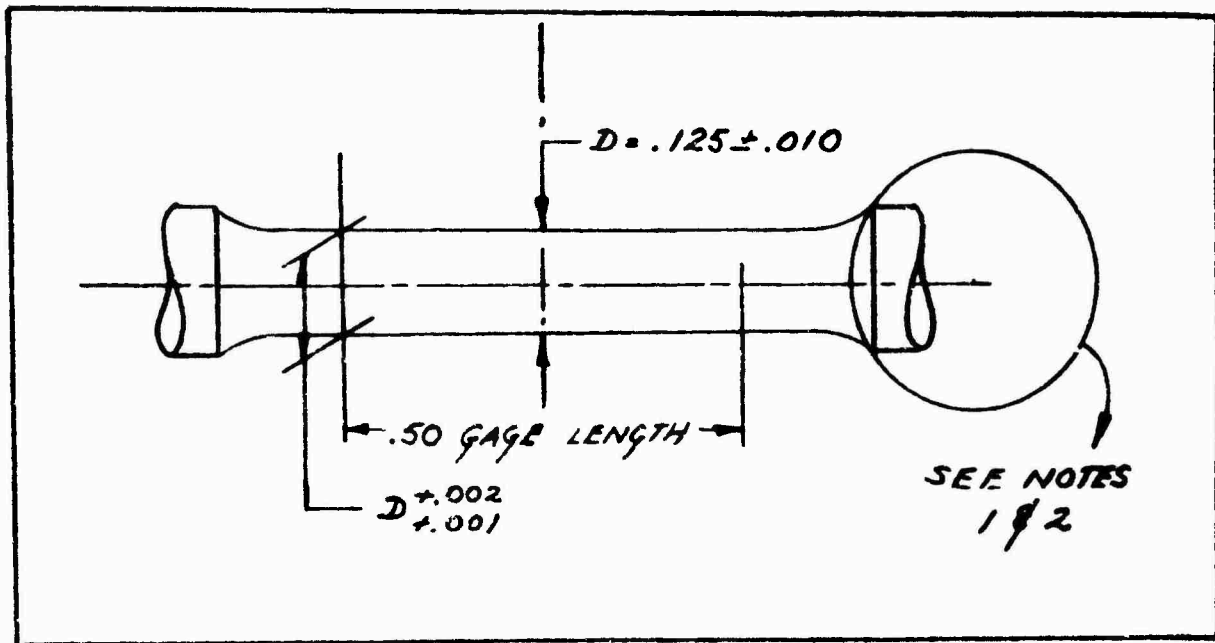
TENSION TEST-SHEET SPECIMEN
